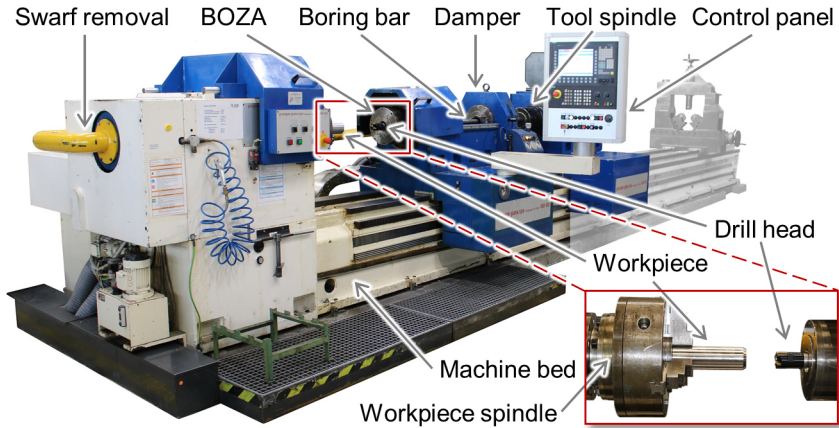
Deep hole drilling machine Giana GGB 560 used for BTA deep hole drilling experiments
